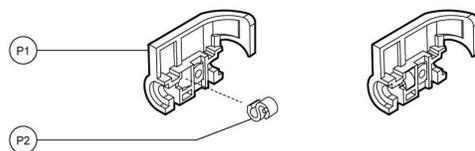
Mounting the STANDUP HINGE SPRING into the STANDUP HINGE
